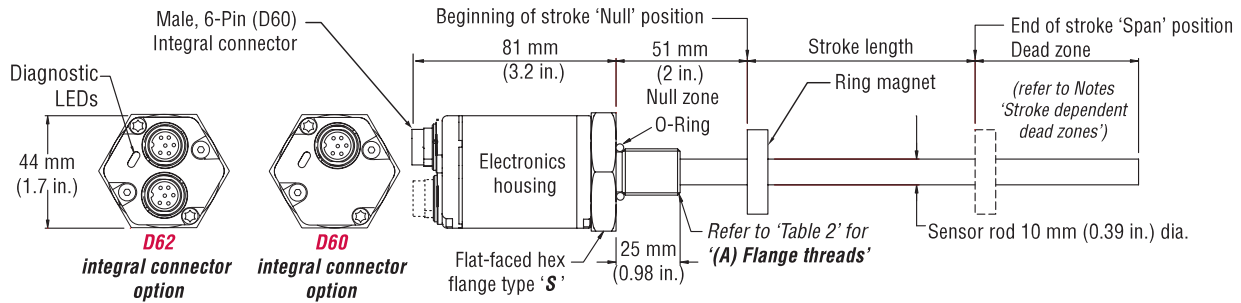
Model RH Rod-style sensor dimension reference (shown with D60 / D62 integral connector options)
